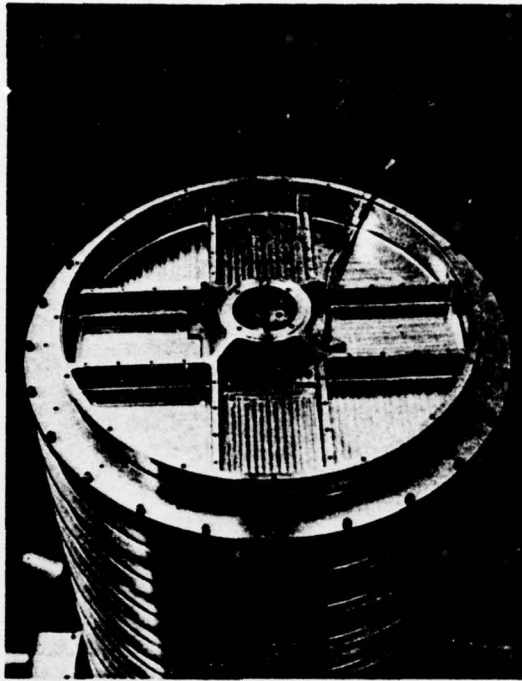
Top View of Top Plate of Vacuum Enclosure Showing Exit of Thermal Sensor Wires, Maser Output and Degaussing Terminal
